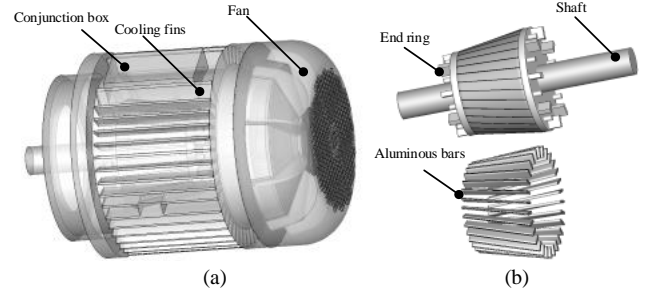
Structure of the conical rotor motor: (a) Cooling construction of investigated motor, (b) Conical rotor core.
